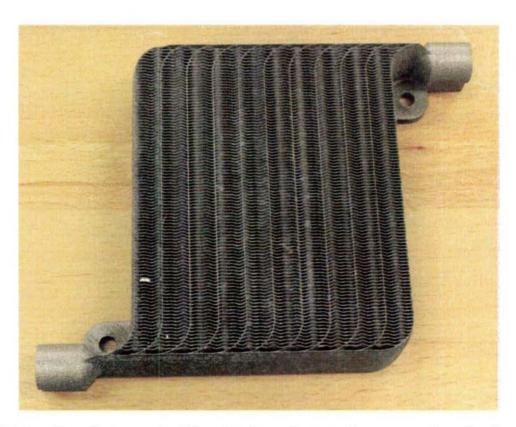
Another photograph of the aluminum heat exchanger produced using additive manufacturing.
